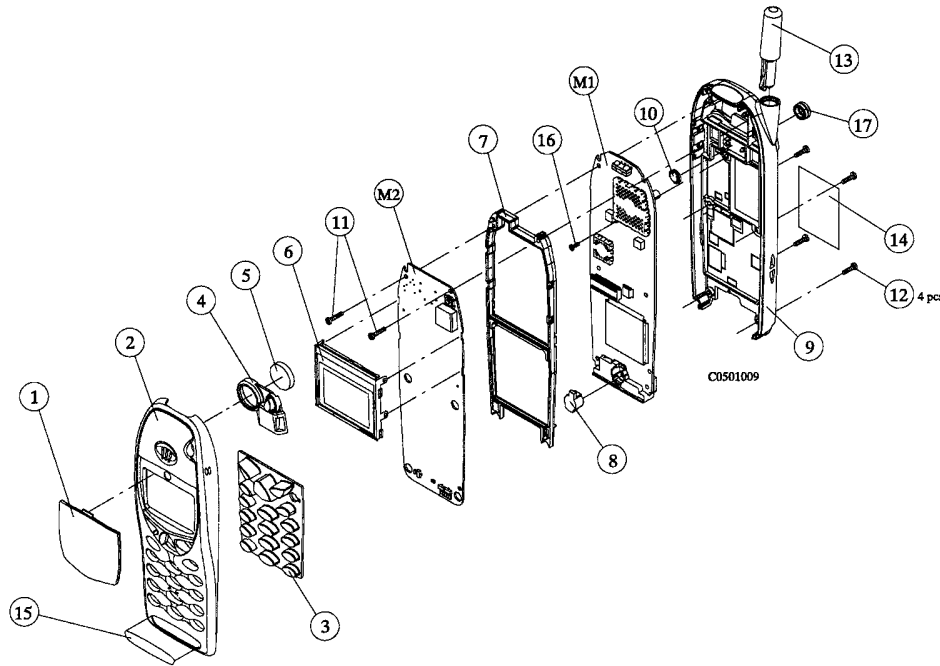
Exploded view of the Nokia 6110 phone. (2) A-cover (front cover), (4) sealing gasket for earpiece capsule, (5) earpiece capsule, (M2) UI module, (7) frame, (M1) RF & baseband (Engine) module, (9) B-cover (back cover). Other parts: (1) display lens, (3) keypad, (6) display, (8) rubber boot containing microphone, (13) antenna.
